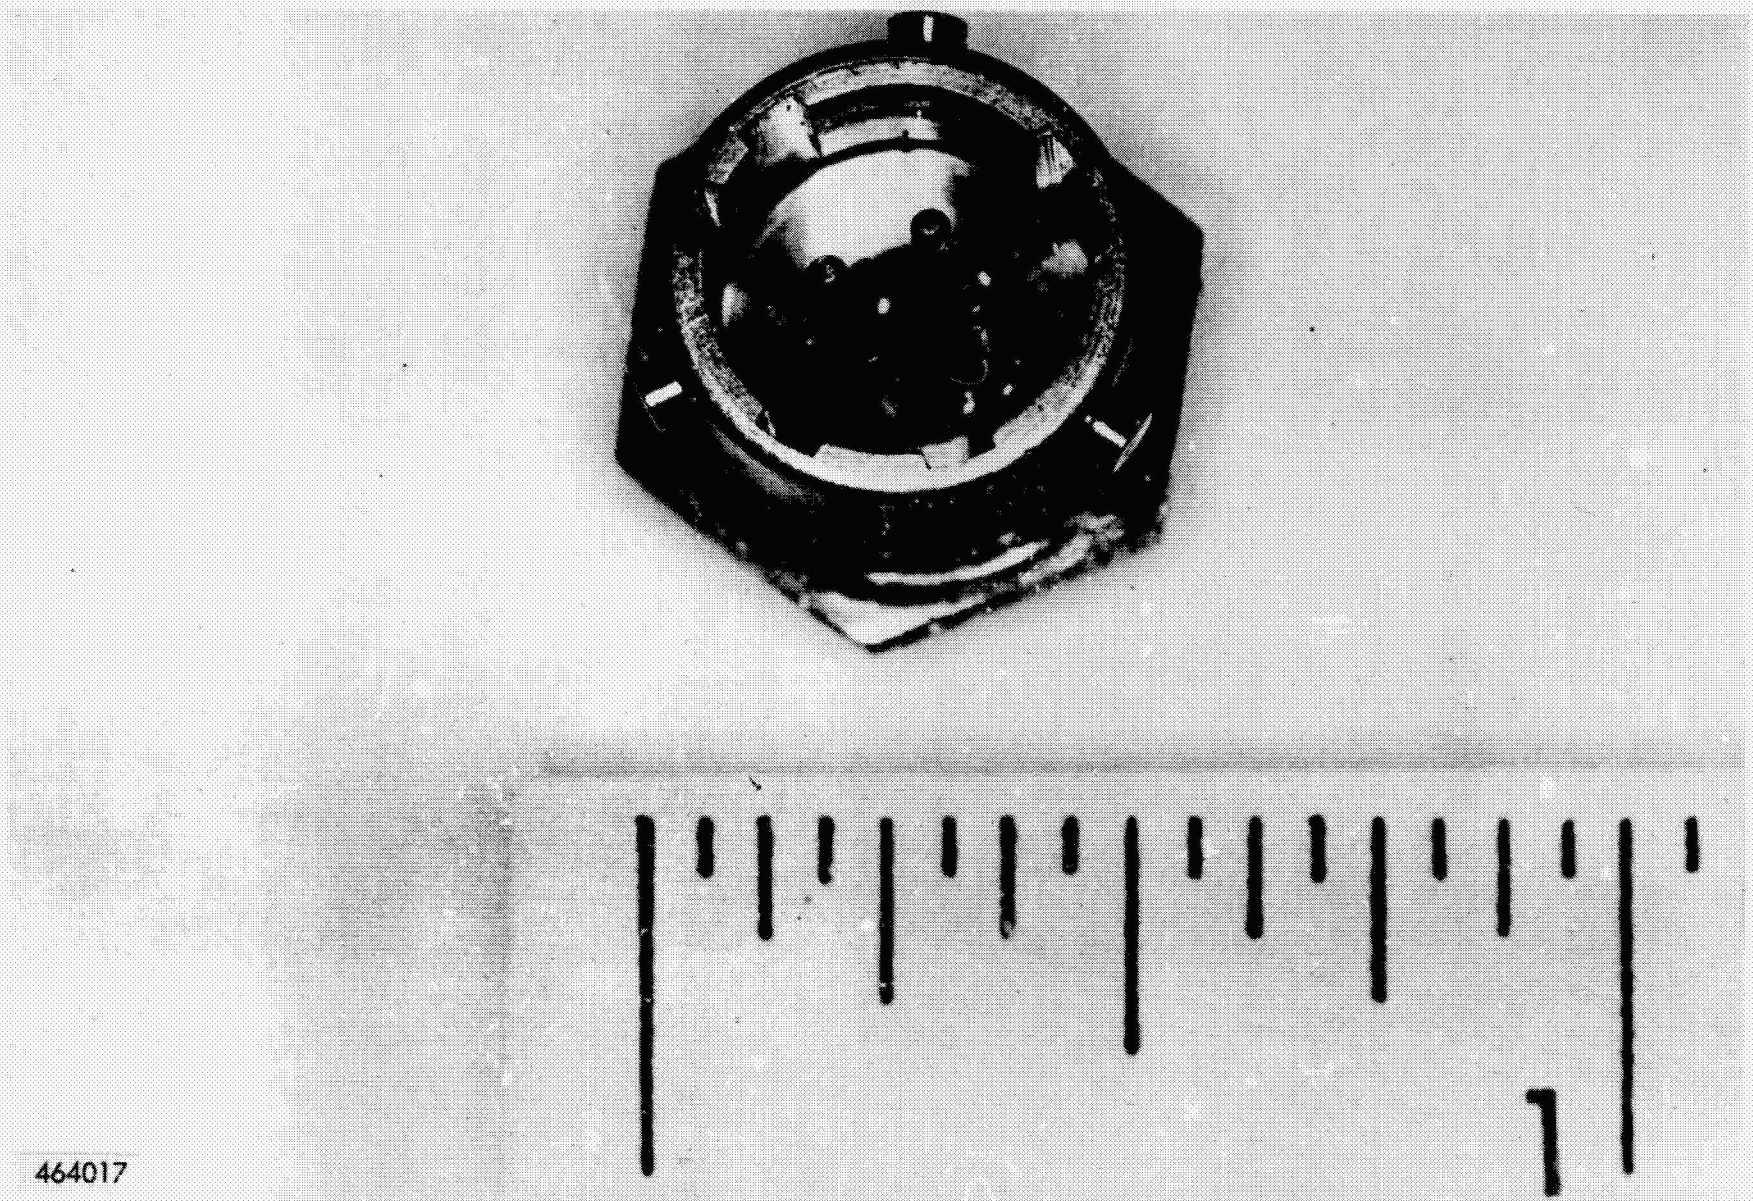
ME 453-0009-0004 INITIATOR MODIFIED - WASHER REMOVED
